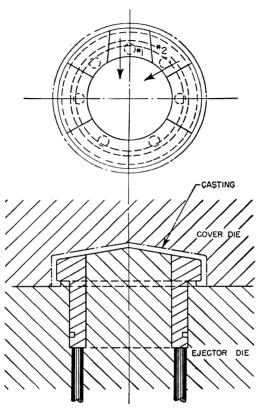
One method of casting a part having an internal undercut that extends all around the casting. The undercut is formed by seven loose pieces that are assembled around the core prior to making the shot and are ejected with the casting on completion of the casting cycle.
